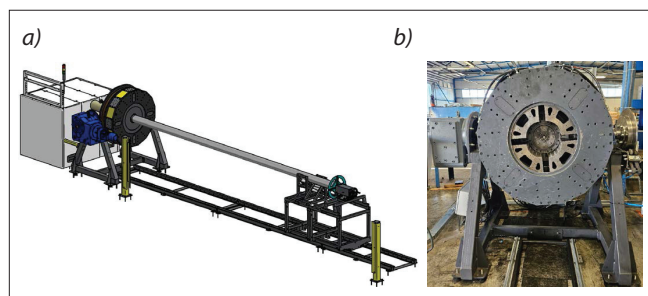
a) realized machine for centrifugal forming of steel pipe ends, b) pneumatic brake as an innovative element for improving working assembly stability
